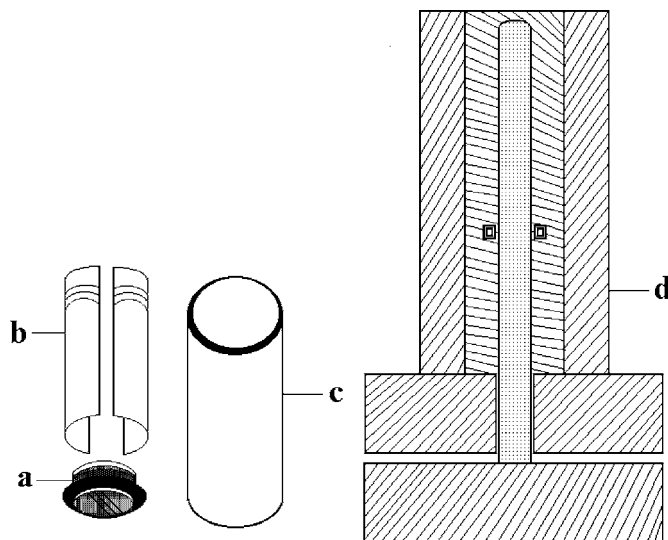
Sample cartridge and loading tool; a—half-tubes; b—bottom part; c—loading tube; d—loading tool.
